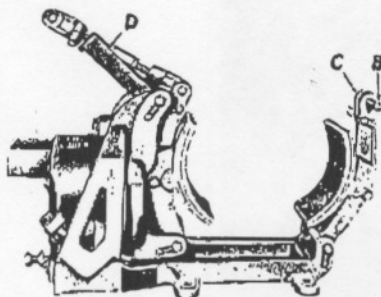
Tie Bar Assembly swung back to permit installation of brake from side of shaft
